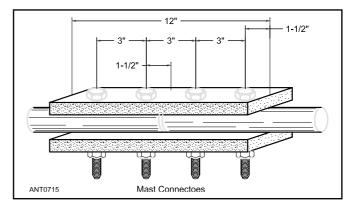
Mast coupling connector details for the portable quad. The plates should be drilled two at a time to ensure the holes line up.
